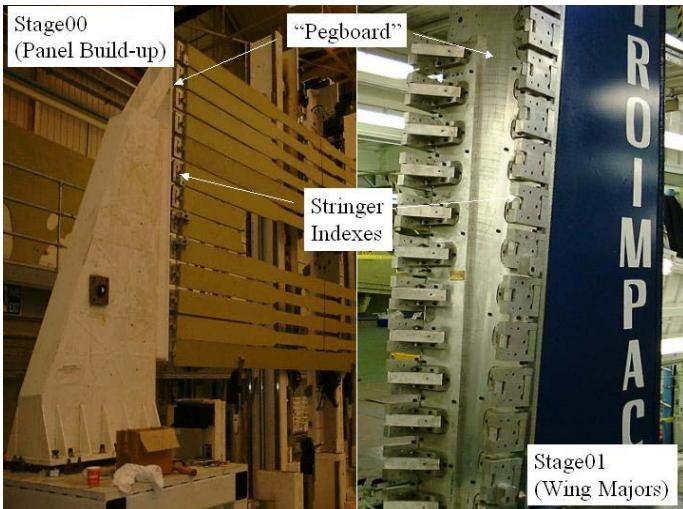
Determinate Assembly on A340-600 test-panel tooling modifications
